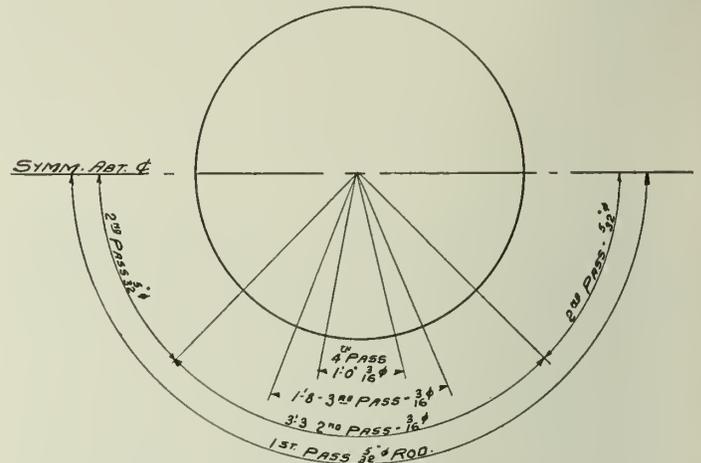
Weld Metal Deposition Diagram for Circumferential Weld, Specials and Field Welding.
